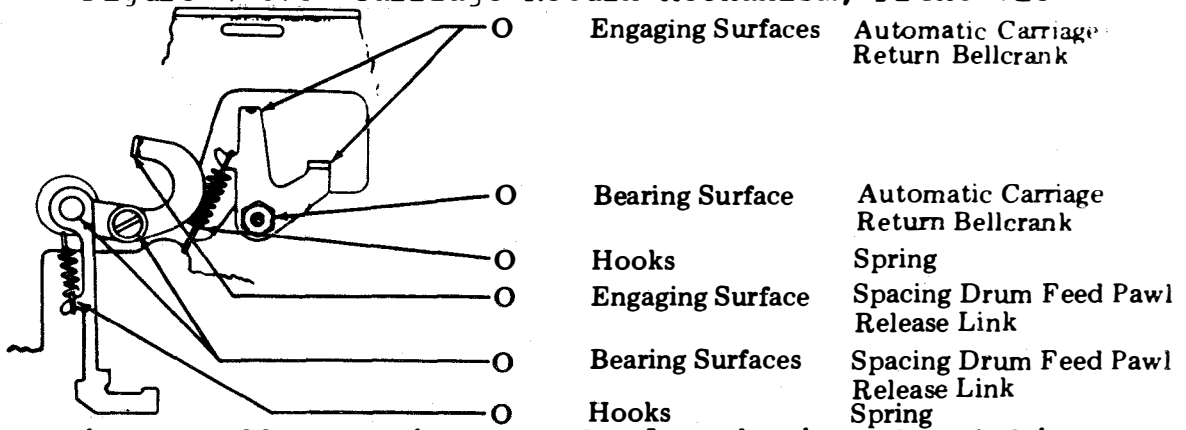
Spacing Drum Feed Mechanism, Front View
